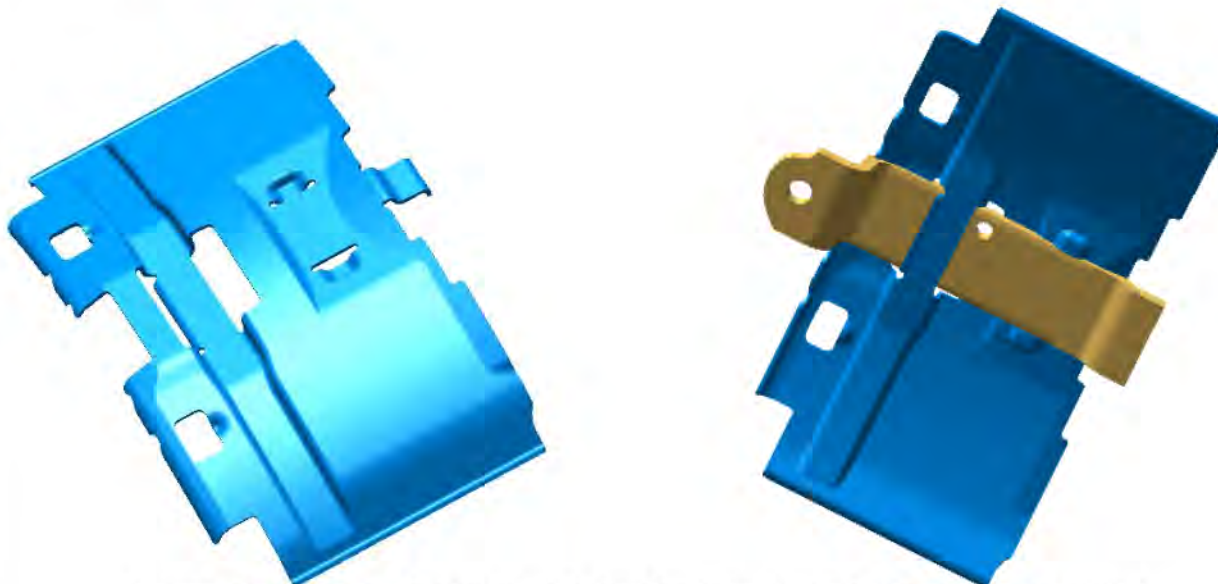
(Left) Pad Shield, (Right) Pad Shield with the Retainer Strap Installed
